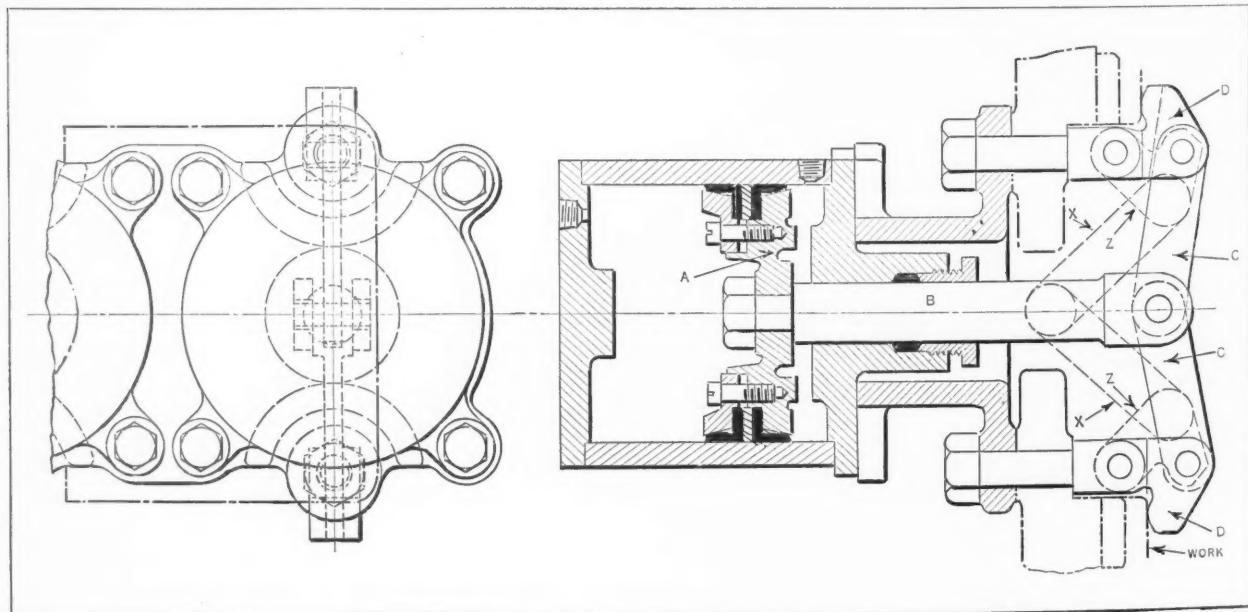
Air-operated Clamping Unit, which may be Incorporated in Various Types of Work-holding Fixtures and Jigs
